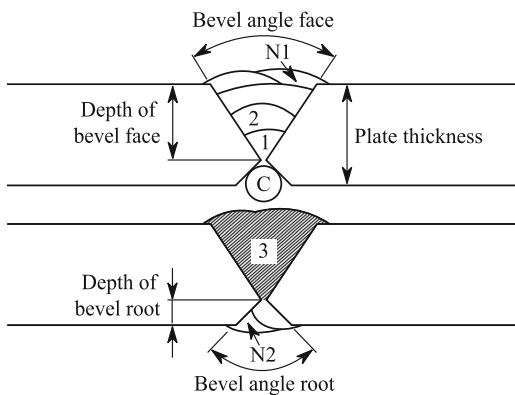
The welding sequence along with the groove geometry. Note that (C) specifies the ceramic backing. Further details are outlined in Table 3
